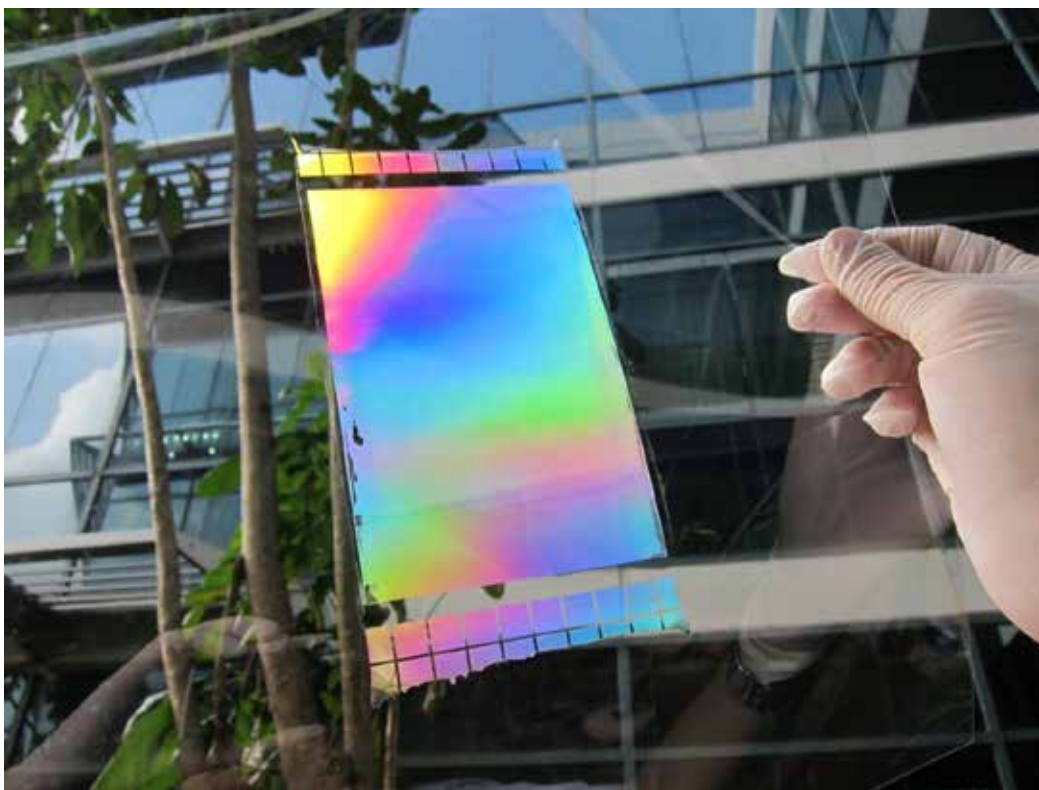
Large area 160 x 75 mm, 500 nm diameter AR1 pillar resin mould fabricated via UV roll-to-roll nanoimprinting from an mPDMS exposed h-PDMS/PDMS composite mould. Test metrology fields are shown to either side, which intersect with the resin coating edge. Edge defects originate from oxygen inhibition.
